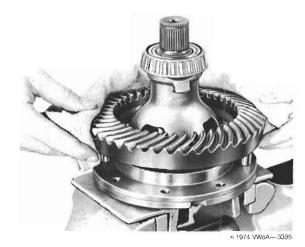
Heated ring gear being installed on the differential housing. Note the centering pins.
